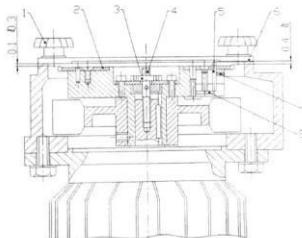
Adjusting Milling Cutter Height and Groove Depth
